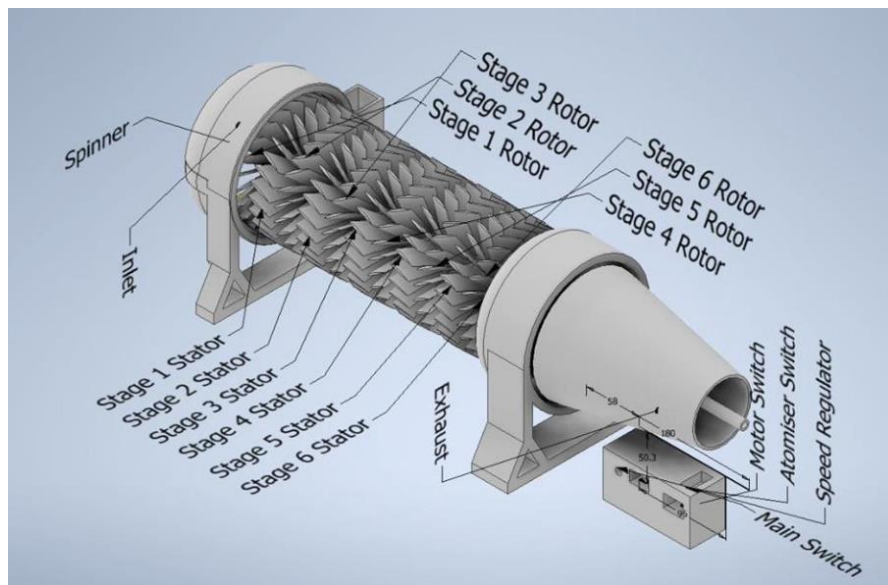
Isometric View of Aircraft Engine Compressor Learning Kit.
